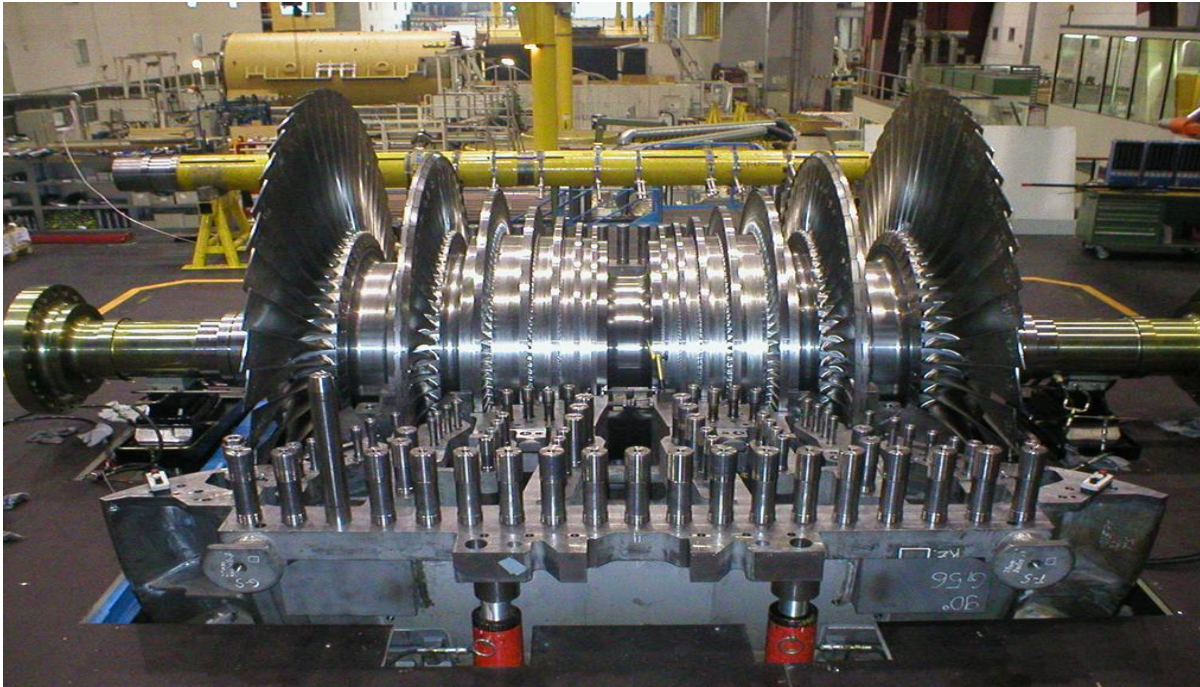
BB73-8.7m² Rotor Assembly with Cylinder Base
